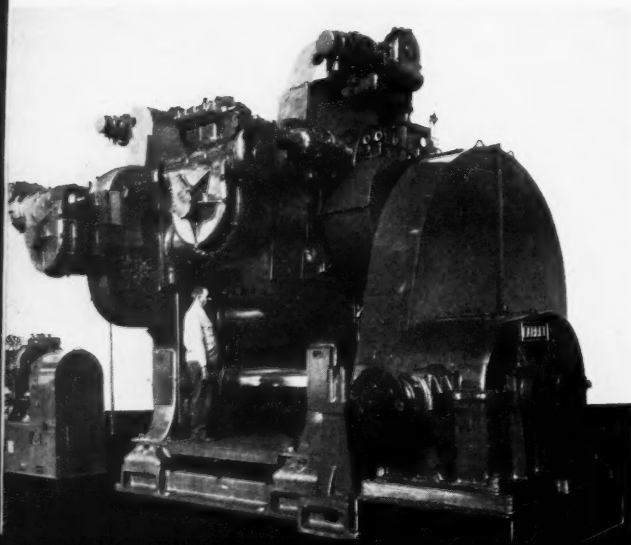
Four-Roll Z-Type Calender for Double-Coating Tire Cord. This Calender has 28- by 70-Inch Rolls, Flood-Lubricated Bearings, Crossed-Axes Mechanisms for Both Upper and Lower Roll Pairs, and Pressure Rolls against Top and Bottom Rolls
